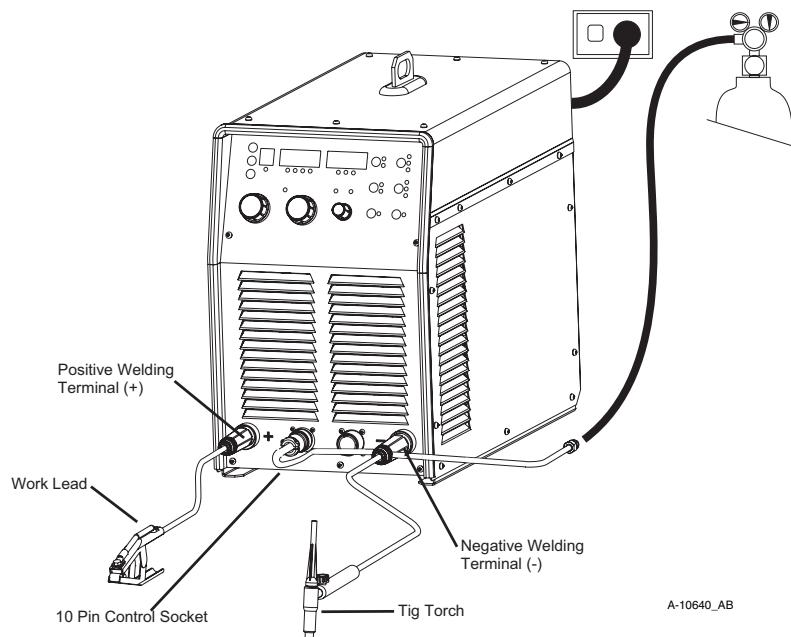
Setup for TIG (GTAW) Welding with Gas Shielding
